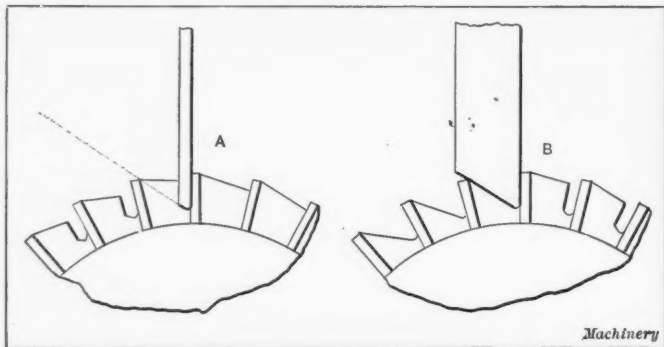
The Two Steps taken in Re-cutting Milling Cutters by Grinding
